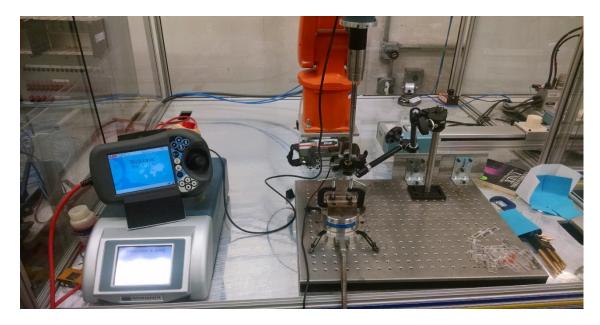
Robotic Ultrasonic Welding System (with thermal camera and force sensor).
